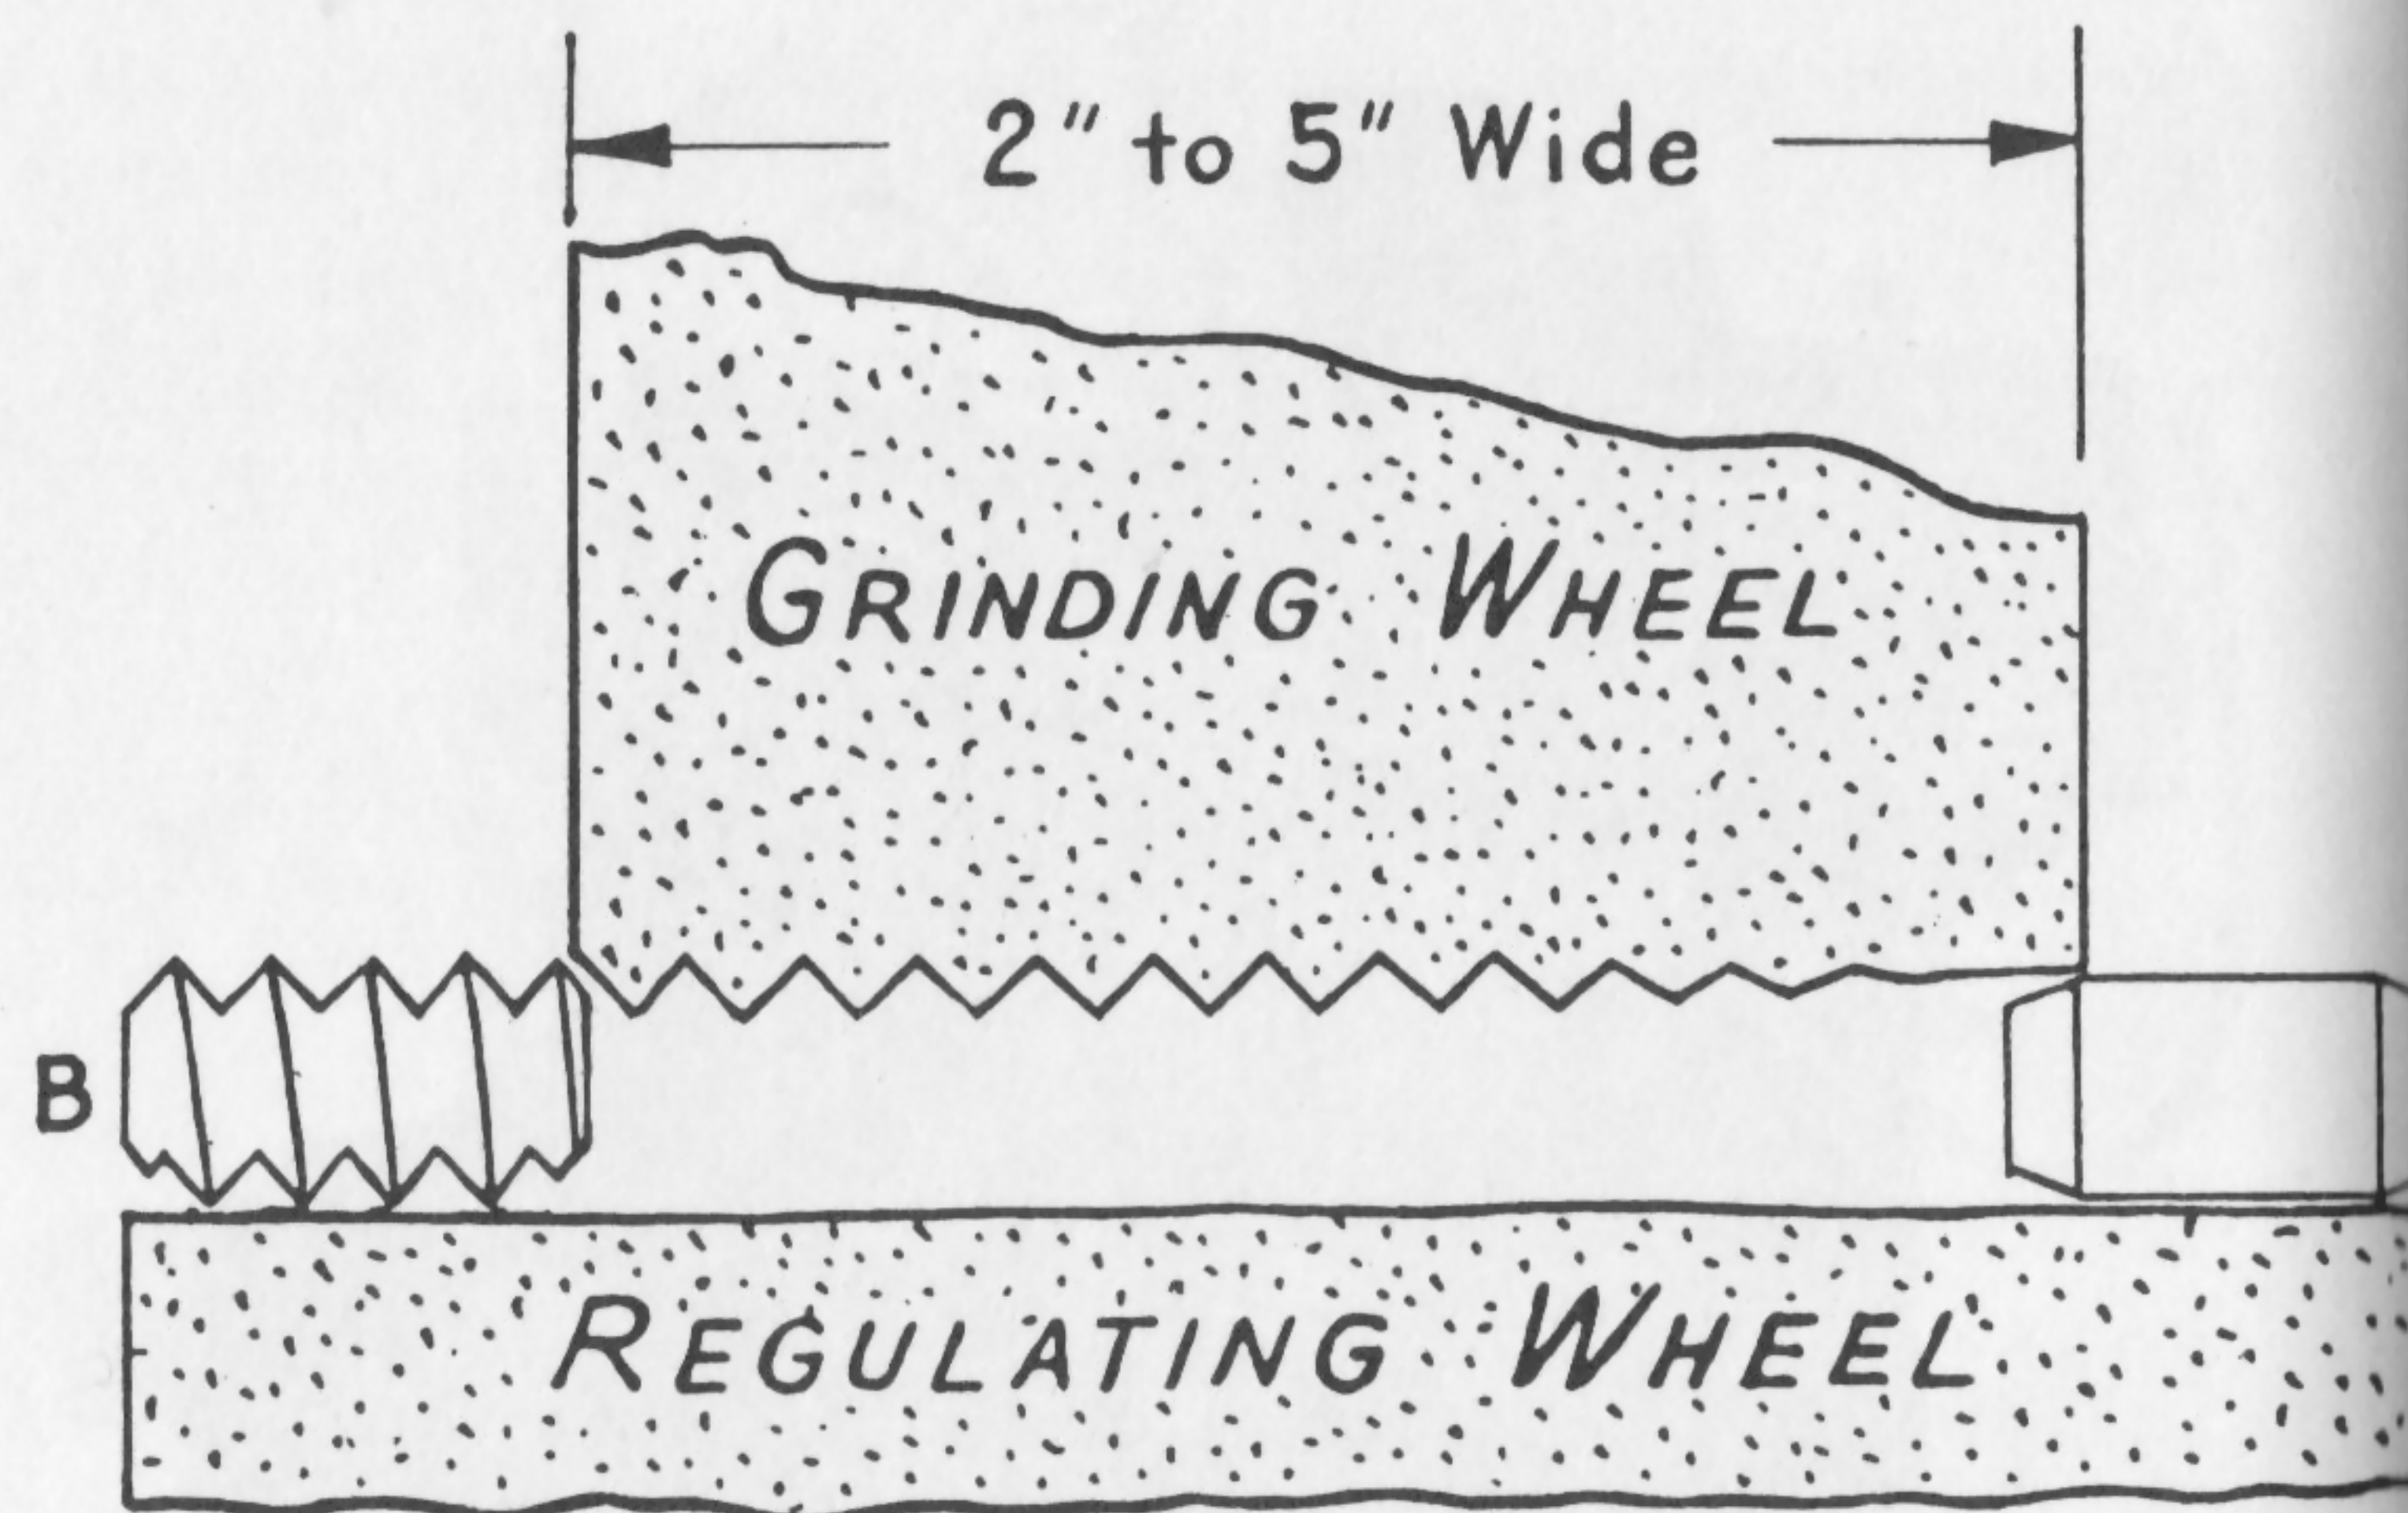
CENTERLESS THREAD GRINDING (Lewis)
